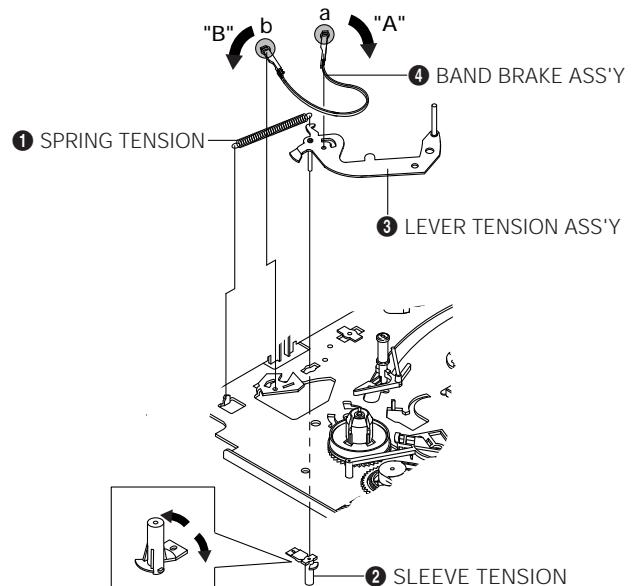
Lever Tension Ass'y, Band Brake Ass'y, Sleeve Tension Removal
